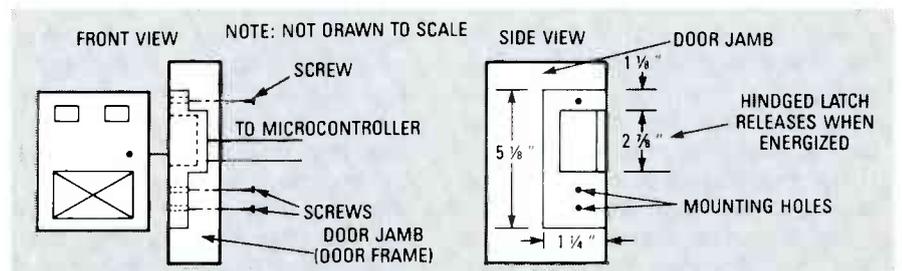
MOUNTING DIMENSIONS for the prototype door latch. This is only a guide; measure your own unit carefully.
